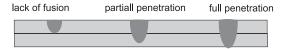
Three typical weld geometries: lack of fusion, partial penetrated and full penetrated weld.
